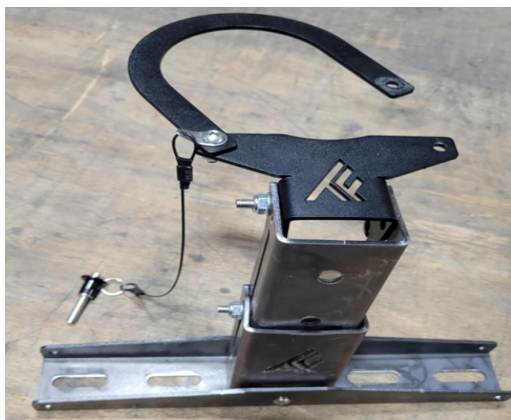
Fasten Tank Release Ring (4) and button lock pin (G) to Pivoting Attachment Plate (5) using a 10mm Socket and 10mm Wrench
